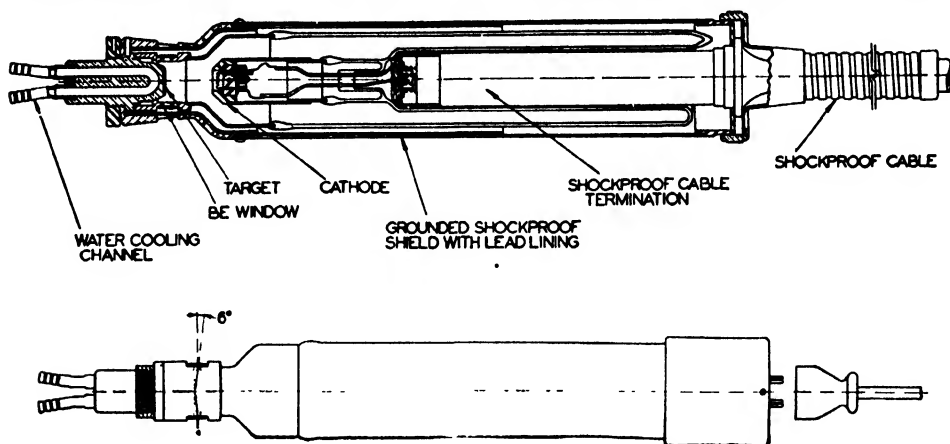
Sketch of sealed-off, shielded tube manufactured by Machlett Laboratories.
